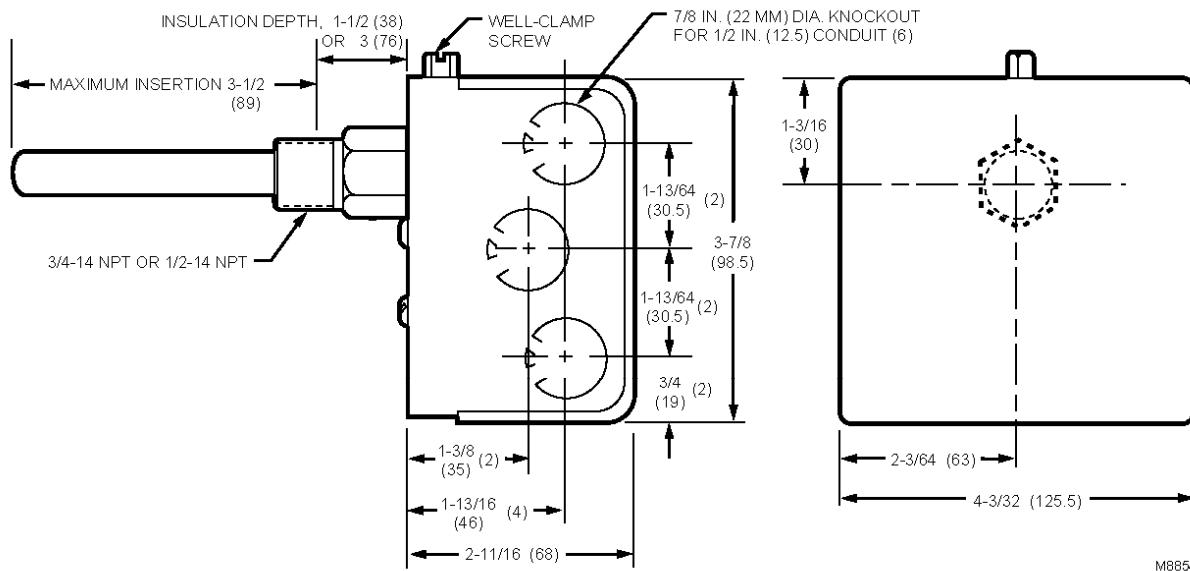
L4081A,B and L6081A mounting dimensions in in. (mm).
